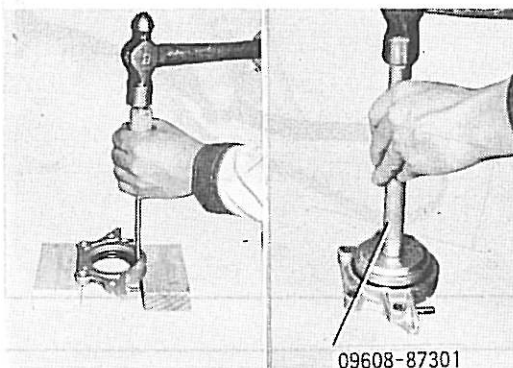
Replacing Crankshaft Rear Oil Seal
